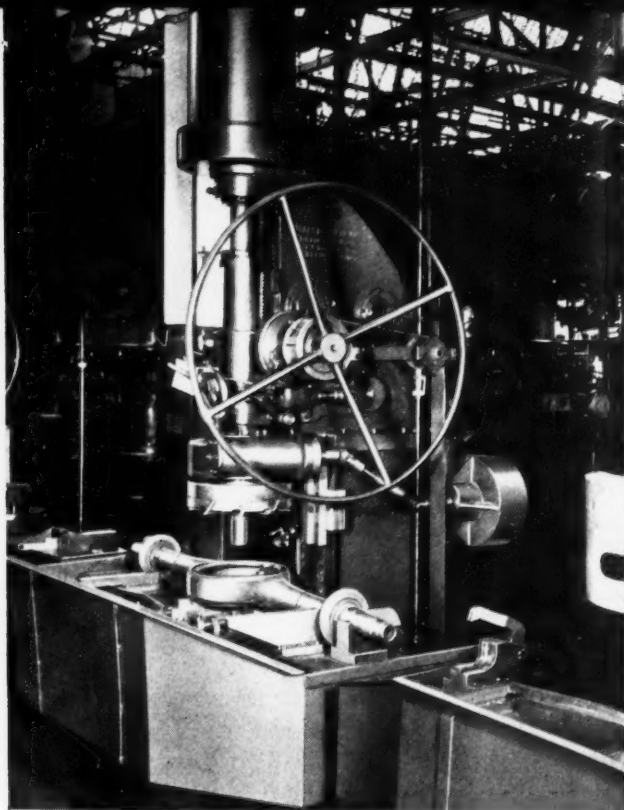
A Multiple-spindle Machine of Double Head Construction Performs a Series of Drilling, Burnishing, Threading, and Milling Operations on Ends of Rear-axle Housings
